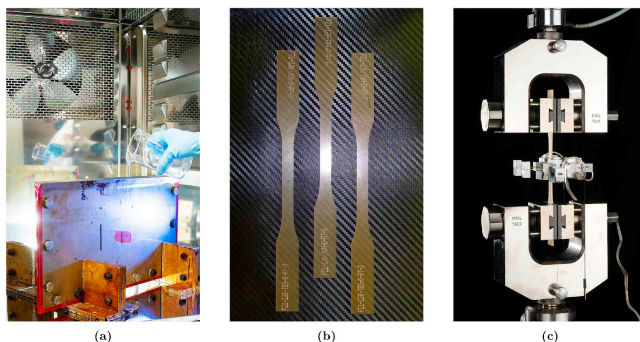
Experimental procedure: (a) Manufacturing using molding process, (b) Dog-bone test specimen prepared for testing, (c) Tensile test with extensometer until failure.
